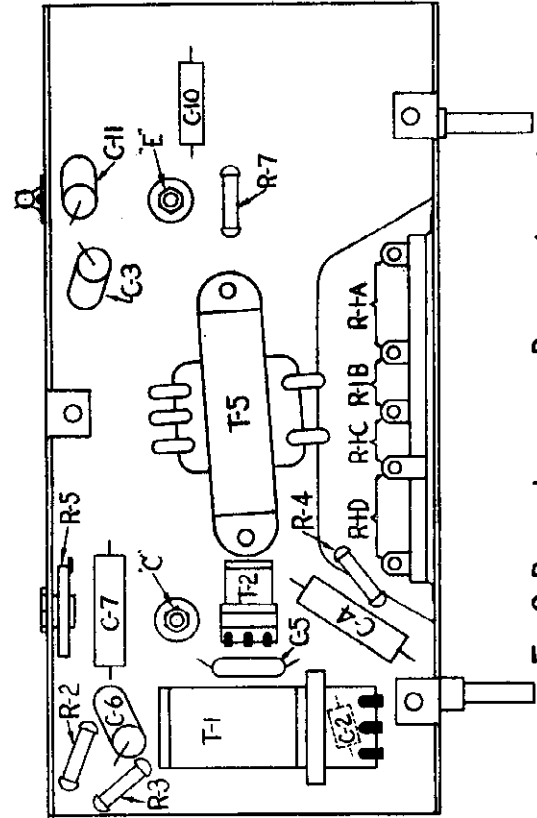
PARTS LOCATING DIAGRAM (BOTTOM)
